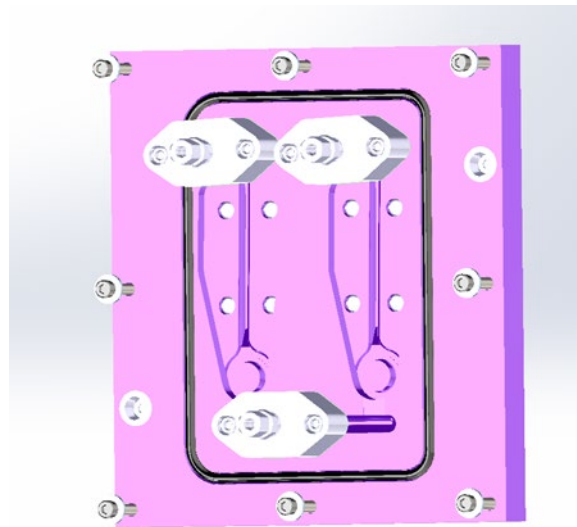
Clip Bracket Tooling Mold for RTM Infusion
